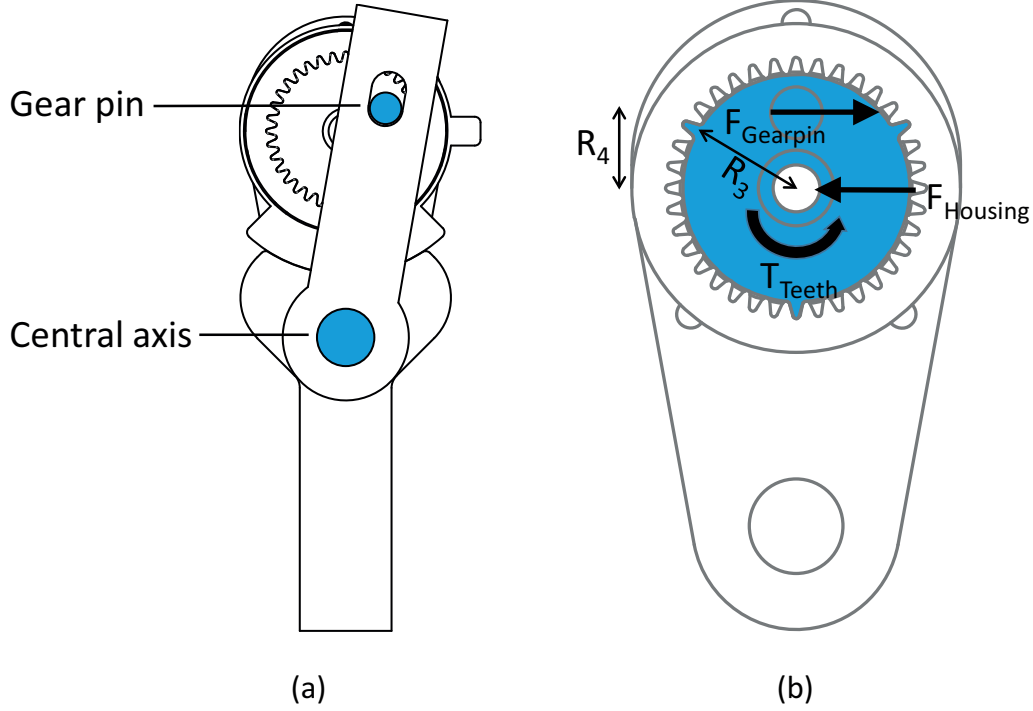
Critical parts prone to shear. (a) Central axis and gear pin. These parts connect the assembly and have to bear high loads. (b) Teeth of the gear. A free body diagram of the the gear is shown. F_{Housing} and T_{Teeth} are exerted by the housing and counteracting F_{Gearpin} which is comes from the shank force in the upper bar.
